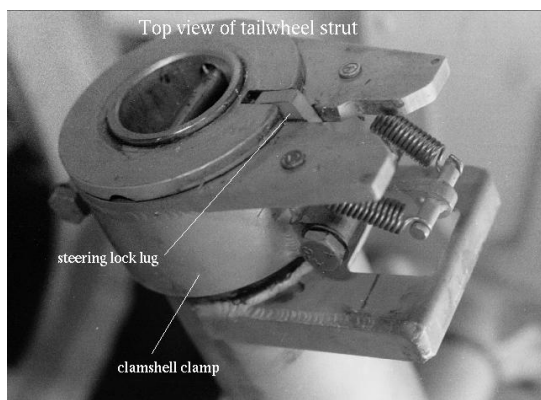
The clamshell clamp installed on the tailwheel strut. It is very difficult to get the tailwheel to turn freely with the clamp installed. Some builders modify this part to incorporate thrust bearings.
